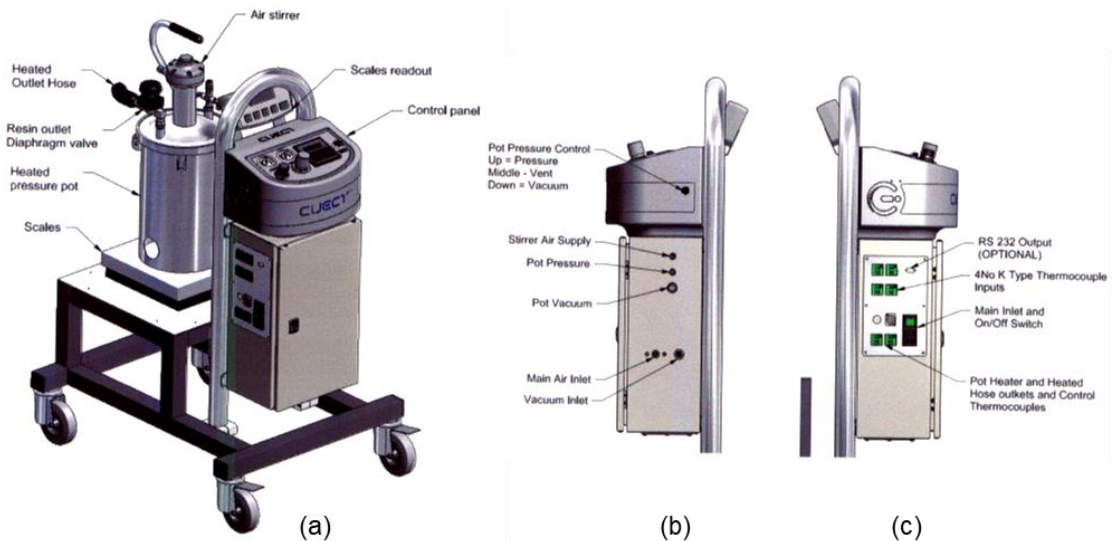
(a) General view of TP-RTM machine; (b) Right and (c) left side of unit control.
